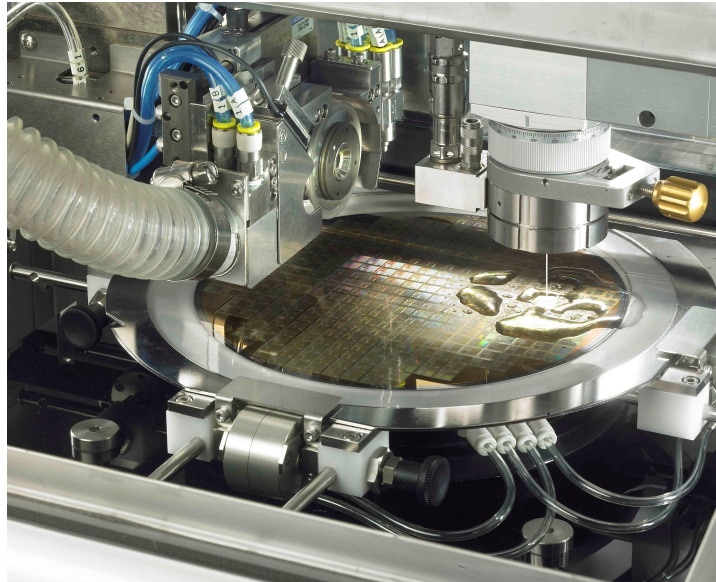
View showing the Disco blade saw (left) and the Synova LMJ optical head integration (right).
